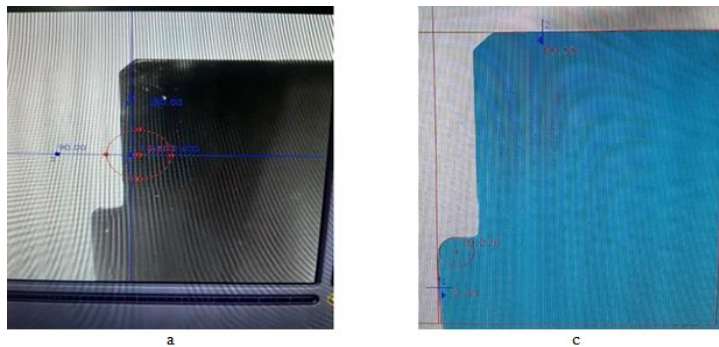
Images of a new reaming special tool on Zoller equipment – details of the cutting edge profiles: a) infrared light method; c) shadow method.
